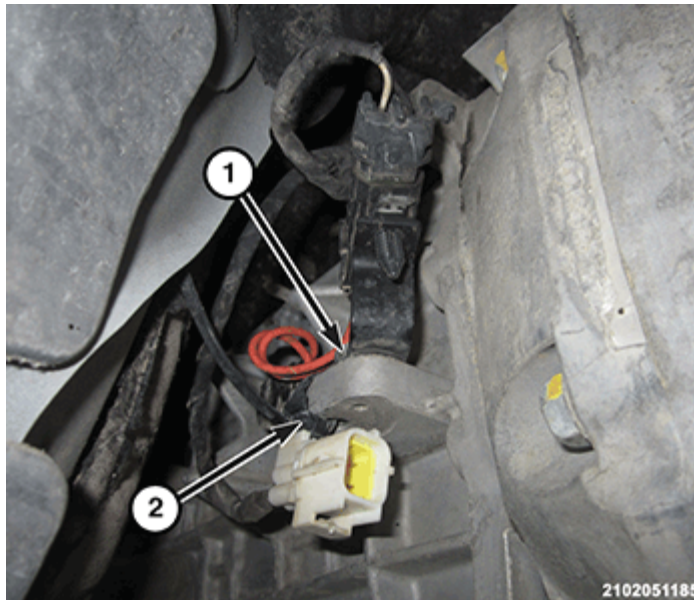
Push Pin Wiring Connectors & Harness Clips
